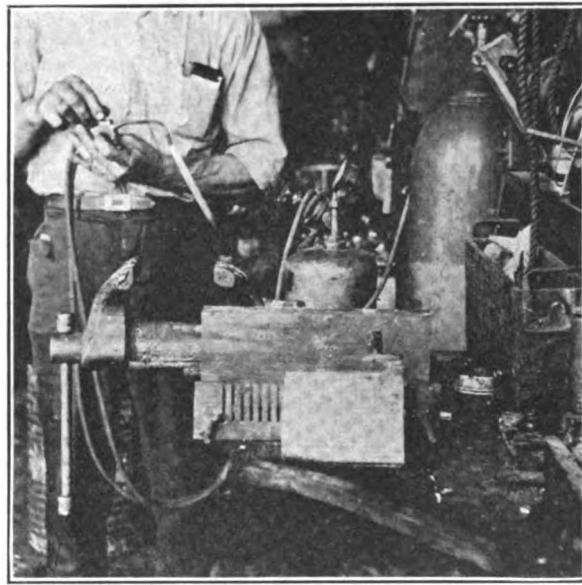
The Completed Job and the Lead Burning Torch Properly Regulated to the Excess Acetylene Flame.
